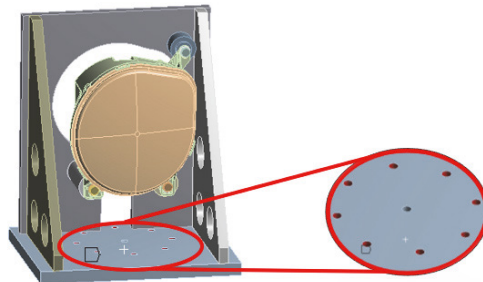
Lamp assembly mounted on the fixture – eight fixing holes on the base plate highlighted
